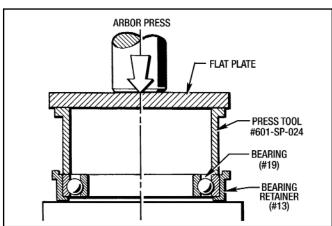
Installing Bearing (#19) into Bearing Retainer (#13)
